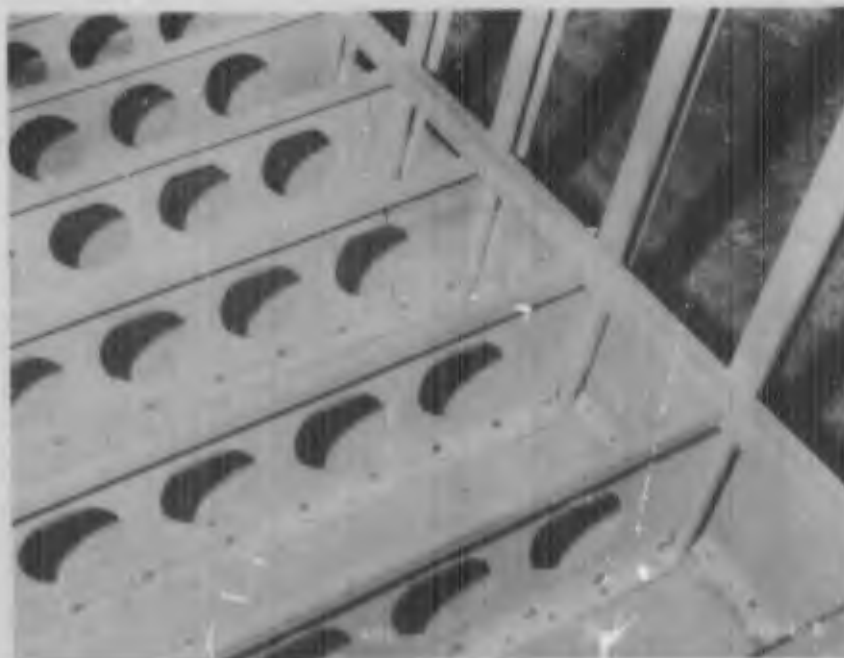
FRAMING AT CENTER OF PONTON. Close-up view of framing and center portion of ponton showing the heavy floor beam and rigid attachment of the T-shaped side frame to the floor. Note that plywood angles are used for attachment of the frame to the skin to save weight. Fastenings or rivets and all joints are glued for additional strength.
